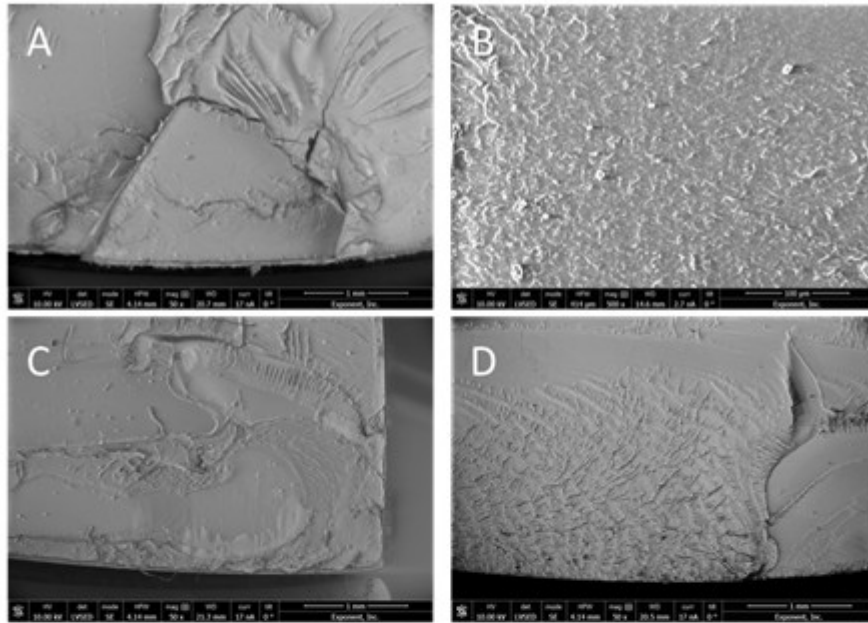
| SEM images highlighting the differences in surface morphology exhibited on ESC fracture surfaces. (A) ABS fracture surface near an origin. (B) ABS fracture surface further away from a crack origin. (C) PMMA fracture surface after exposure to 1.5% DEHP. (D) PMMA fracture surface exposed at 1.5% isopropyl alcohol.
